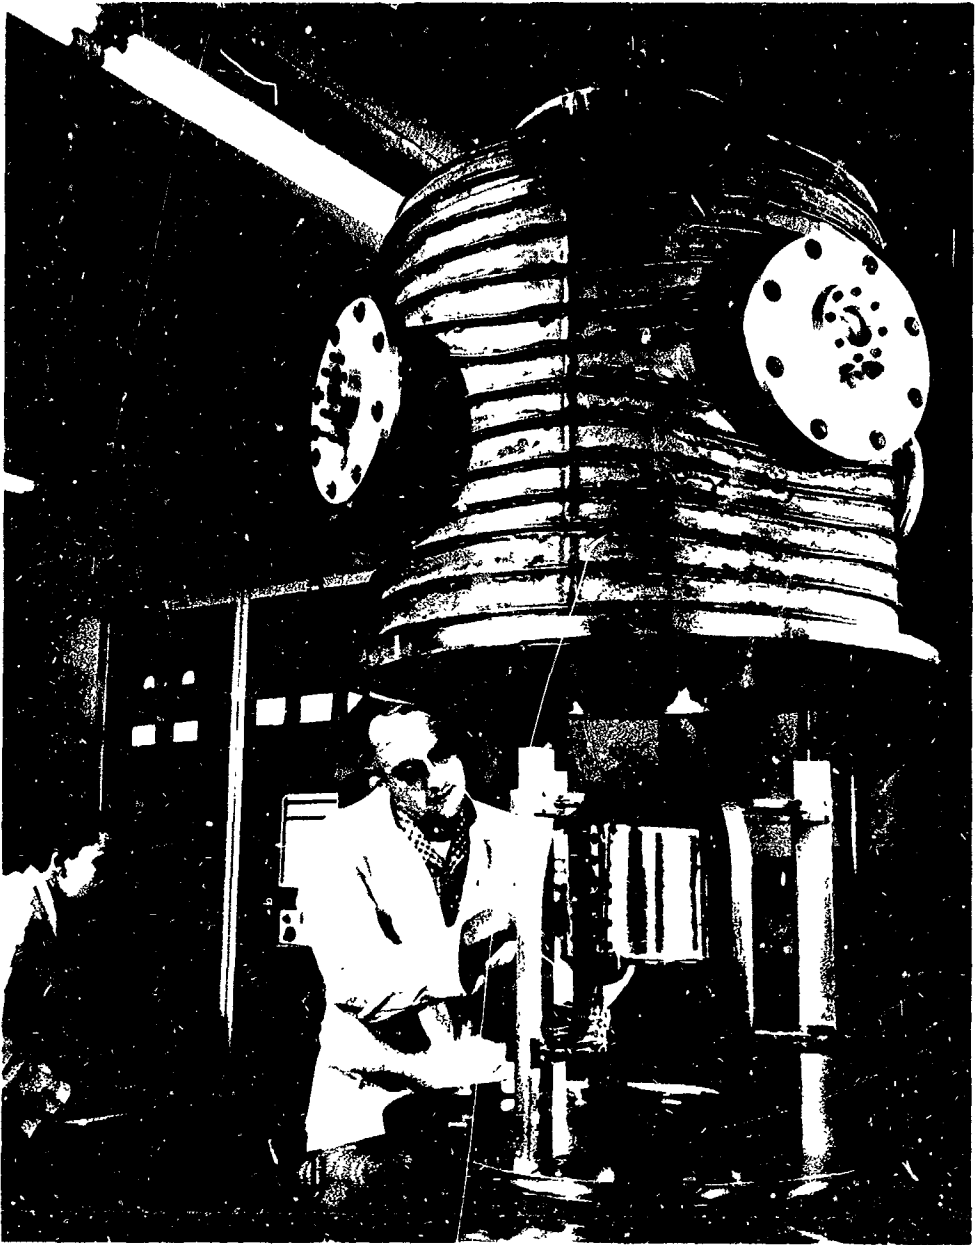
VACUUM SINTERING FURNACE WITH TANTALUM SHEET-RESISTOR HEATING ELEMENTS
